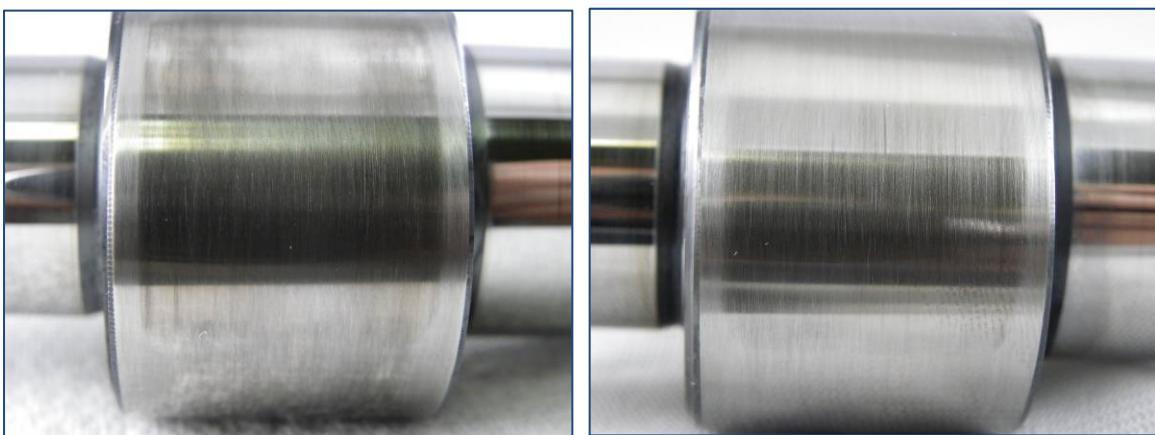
AF-8029 JP-8 (HT Left), HPCR Pump Camshaft, Lobe Surface Close-up, JP-8 (Base Right)
